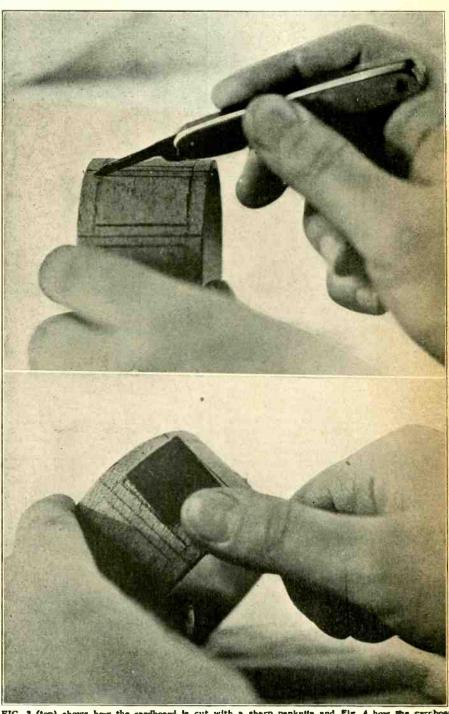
(top) shows how the cardboard is cut with a sharp penknite and Fig. 4 how the carcboa is peeled off. Note the rectangular surface in which the cutting is done.
